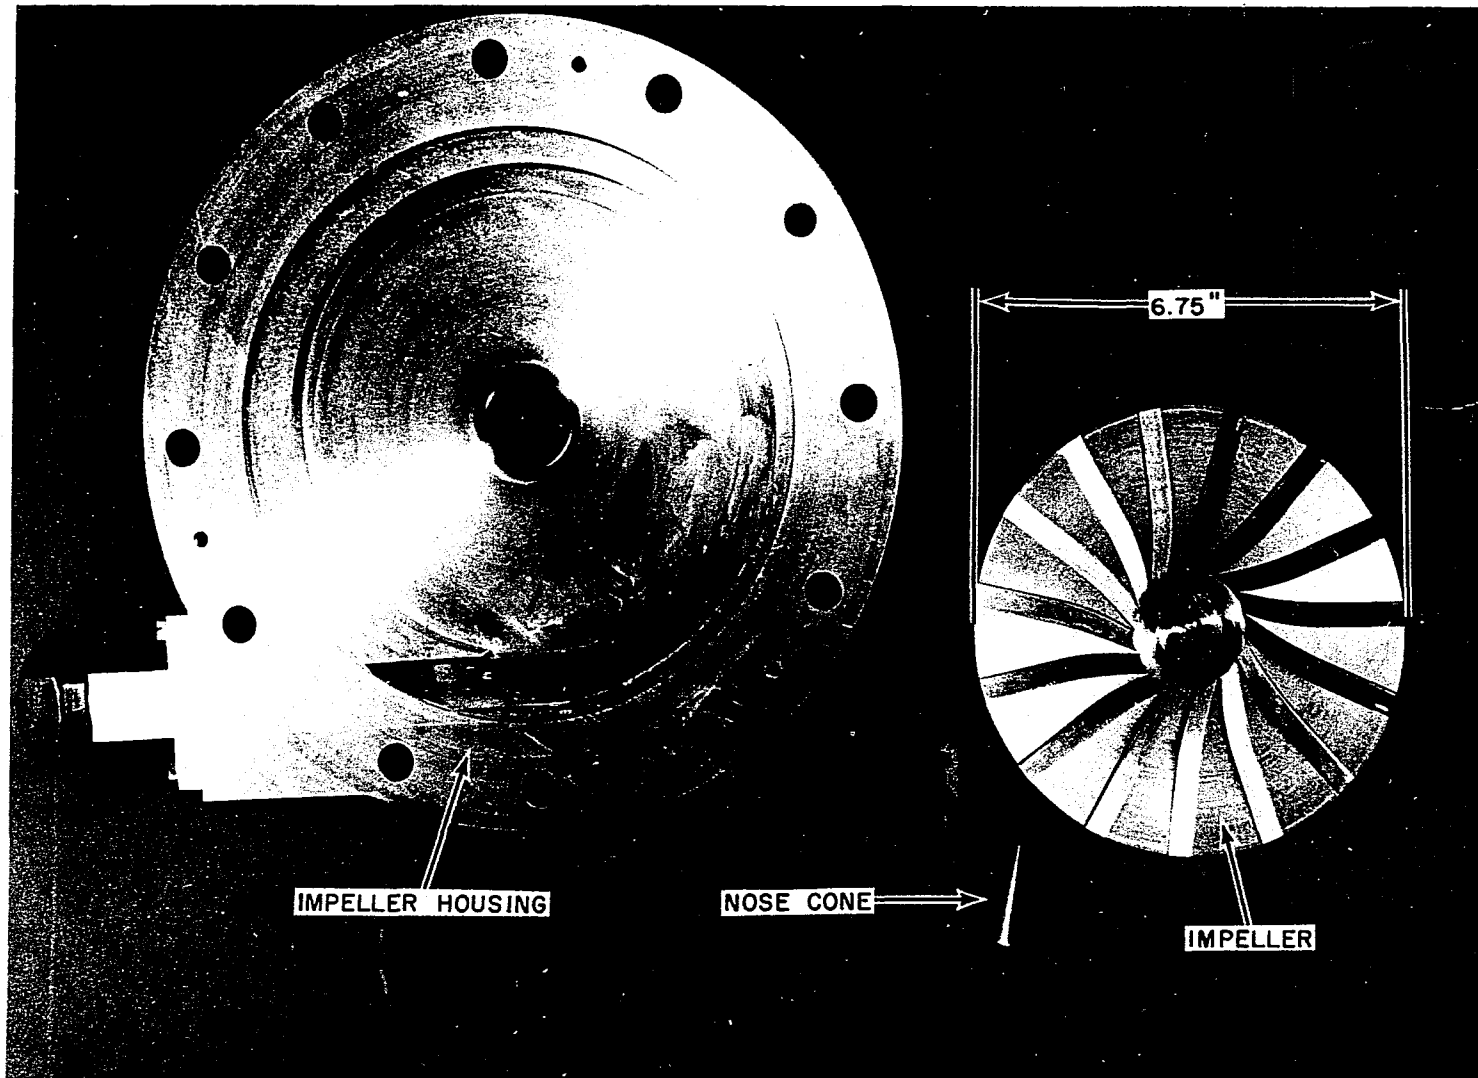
VIEW OF CENTRIFUGAL IMPELLER AND HOUSING VOLUTE
